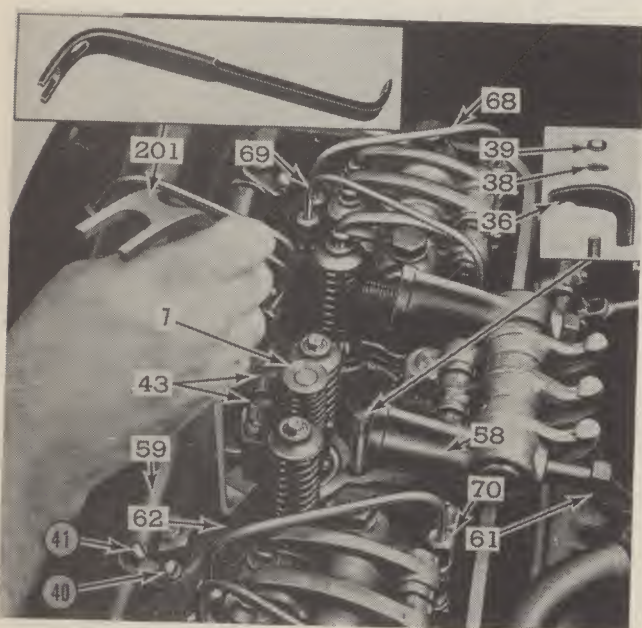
A—Method of removing an injector with GM tool J1227-A.
